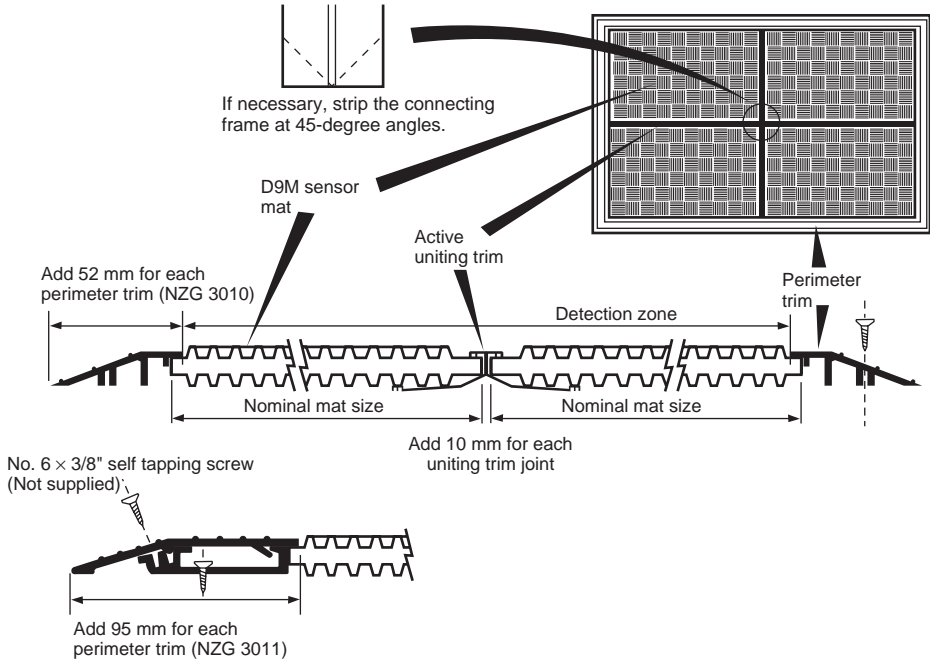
Details of perimeter trim and uniting trim showing detection zone.
